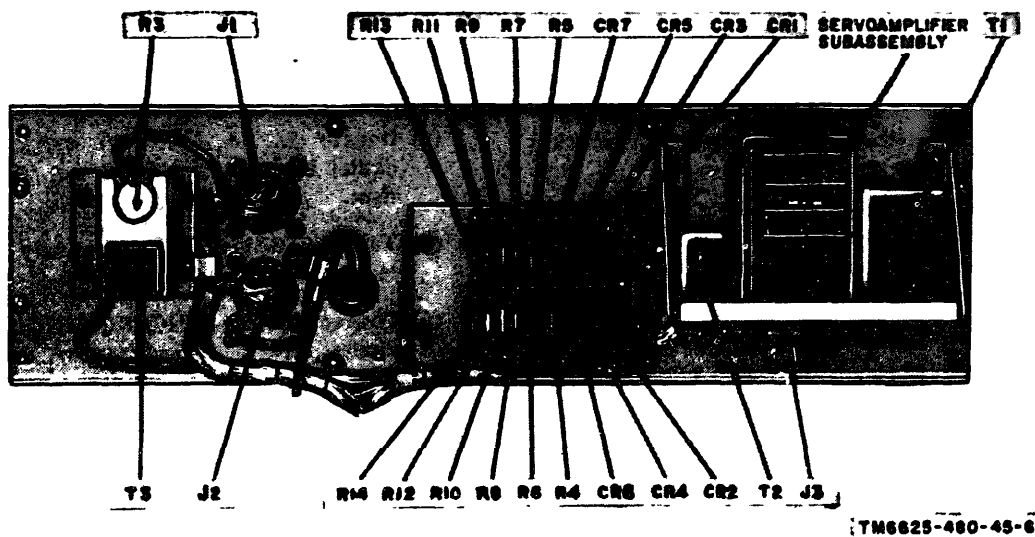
Test Set AN/ASM-111 rear panel assembly, parts locations.
